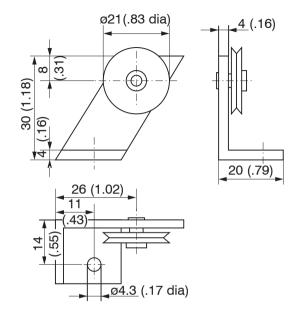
Guide pulley TR3-WDS fix with mounting socket, dimensions in mm (inches)
